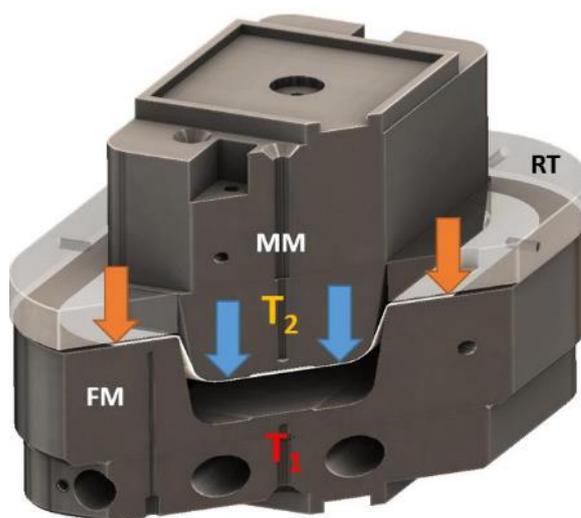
Press forming mould setup, male mould, female mould, rim tool, and forming forces (Tanninen 2015, p. 19).
